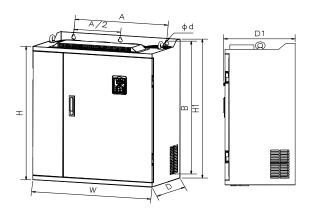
250~450kW G3 Dimension (Frame No.: A12~A13)
